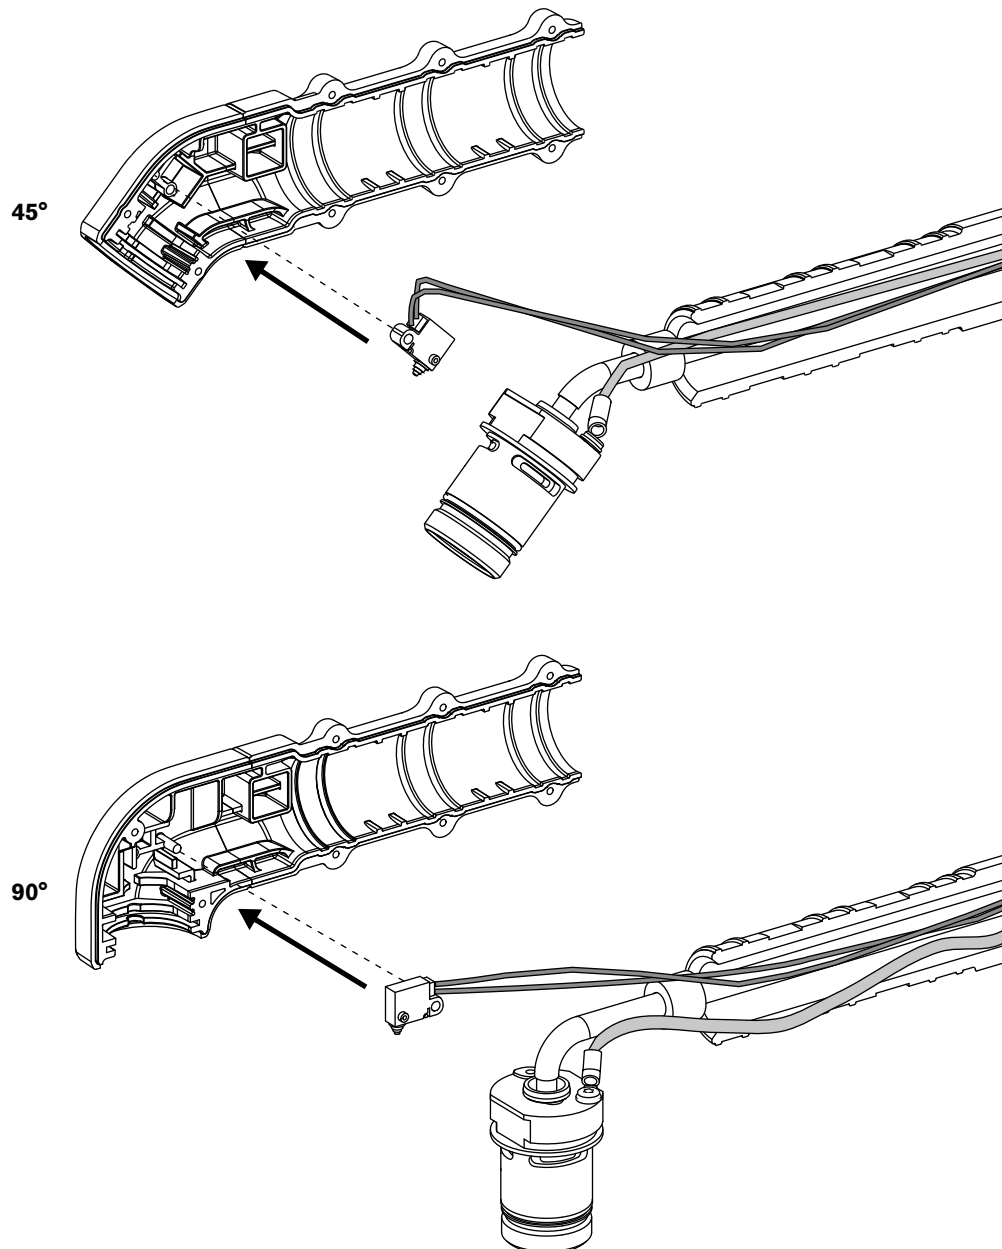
Remove cap-sensor switch from 45° (top) and 90° (bottom) front shell
